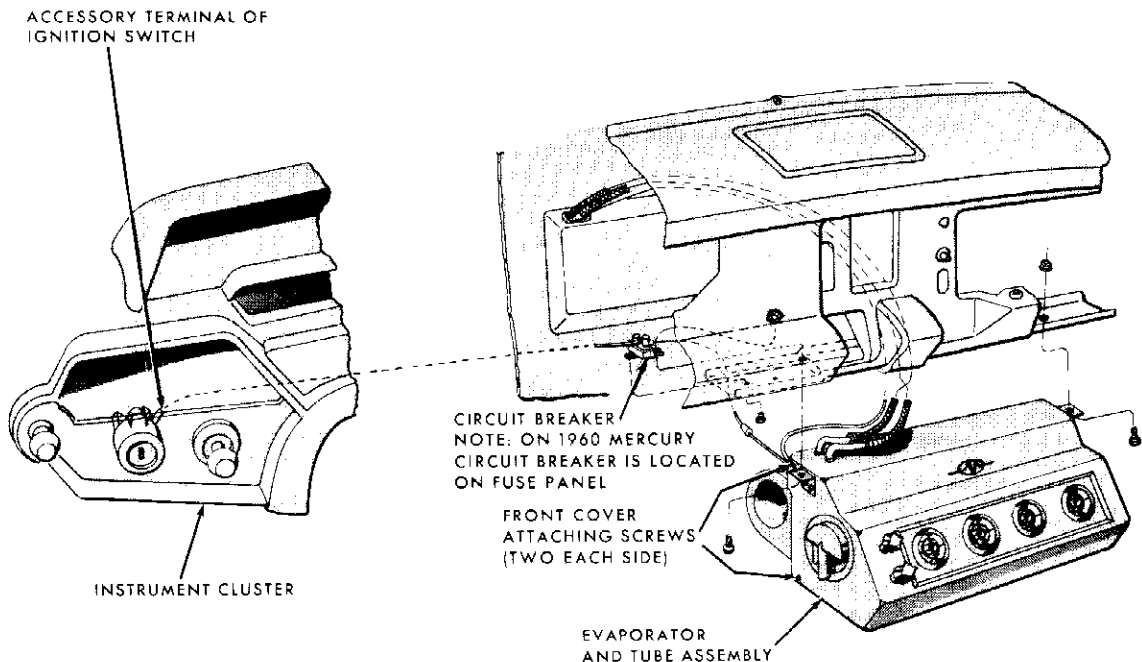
B-2—Evaporator Installation—(61MT-8803)
